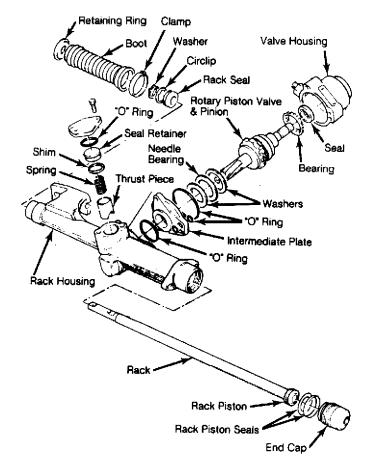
Exploded View of 80 & 90 Power Steering Gear Courtesy of Audi of America, Inc.
